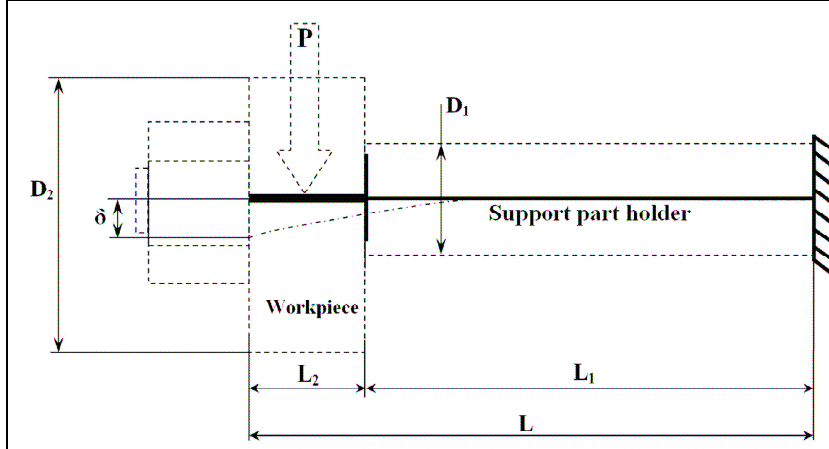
Geometry and dimension of the piece and the workpiece.
